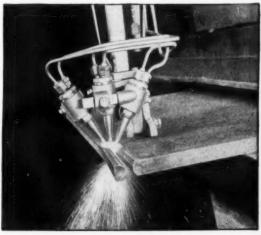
A cutting machine of this type permits side stepping heavy equipment yet provides for accurate cutting.
